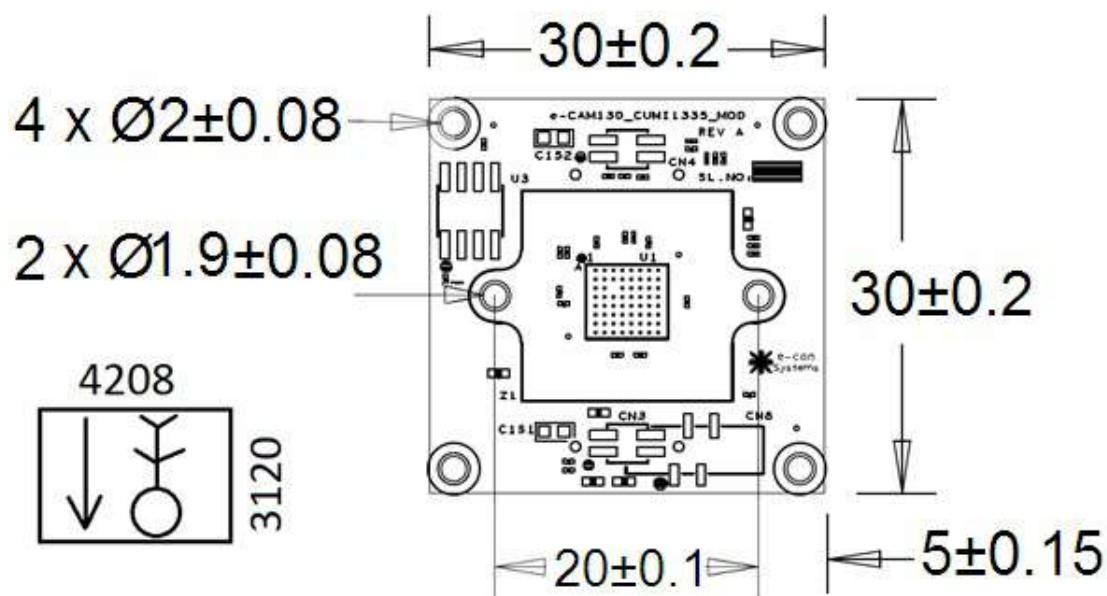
Front Portion of See3CAM_CU135 Module Board Mechanical Dimensions
